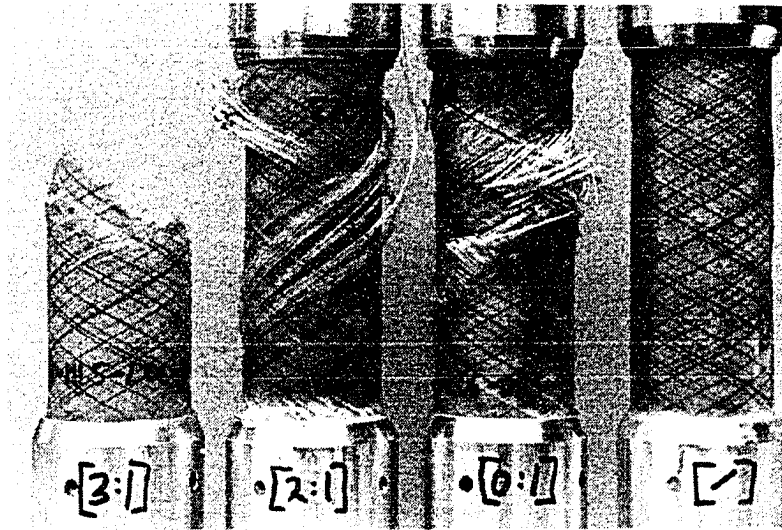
Photograph of specimens failed under (a) [3H:1A], (b) [2H:1A] and (c) [1H:15A] loading conditions, and (d) undamaged specimen (from left to right) (Mertiny and Ellyin, 2002).
